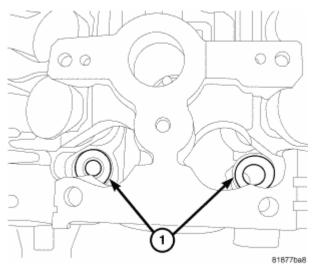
FRONT HEAD BOLT WASHERS Courtesy of CHRYSLER LLC
